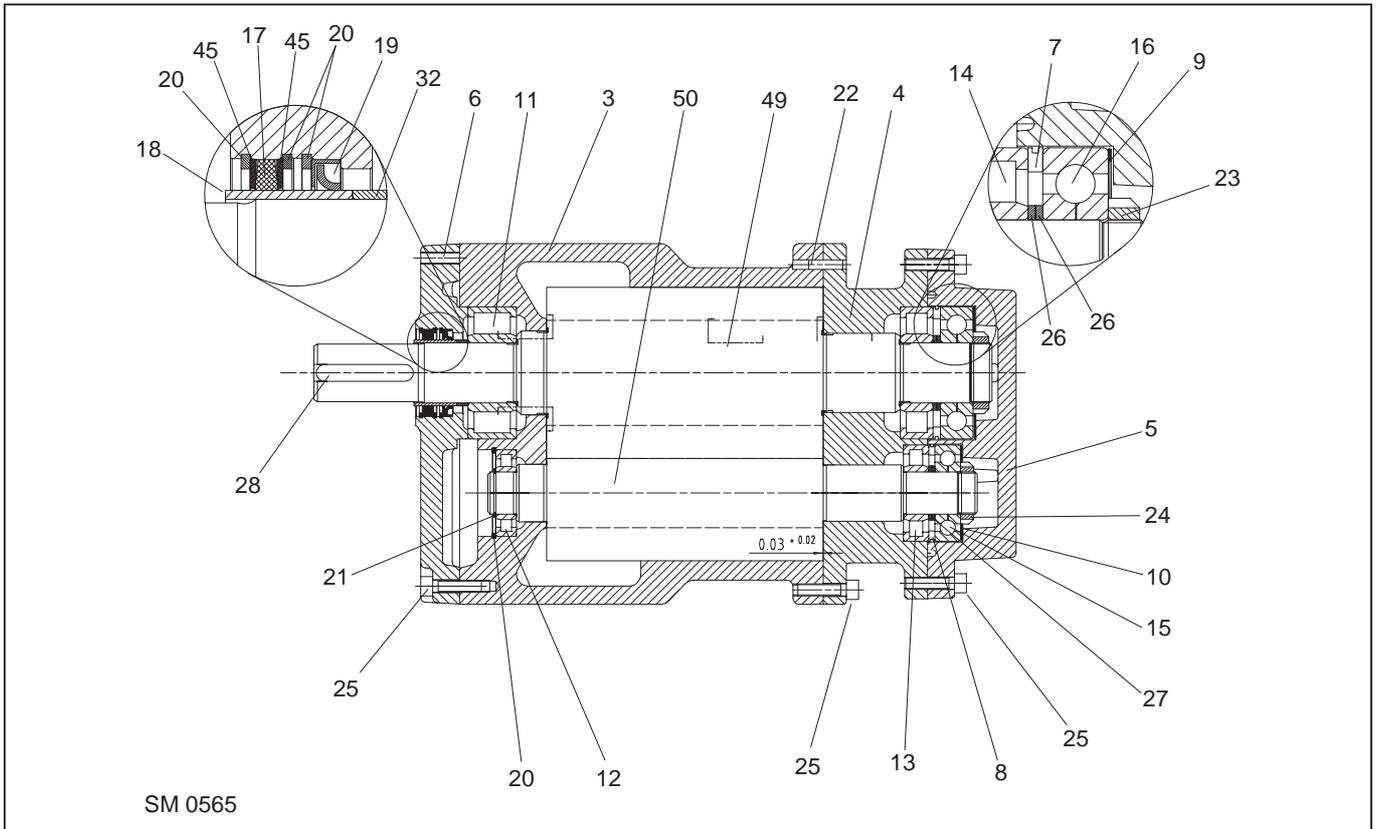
EK 145 NK Air End - Sectional Arrangement
